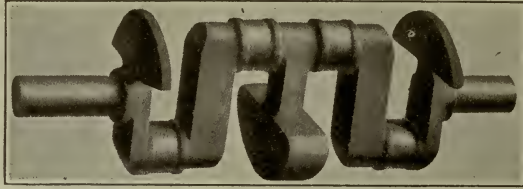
Two Bearing, Three Throw, Counterbalanced Crank Shaft.
